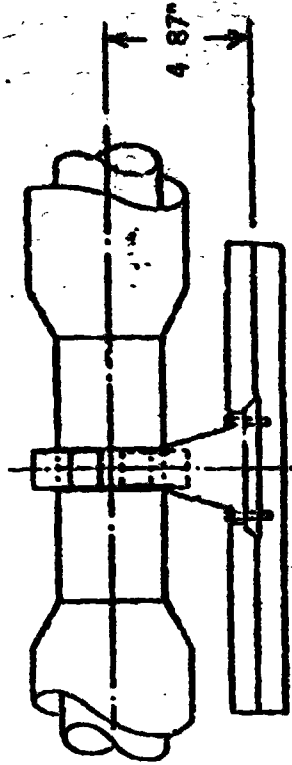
GO₂ Pressure Line/Electrical Conduit Attachment Fitting Type C (Located on LO₂ Panel)
